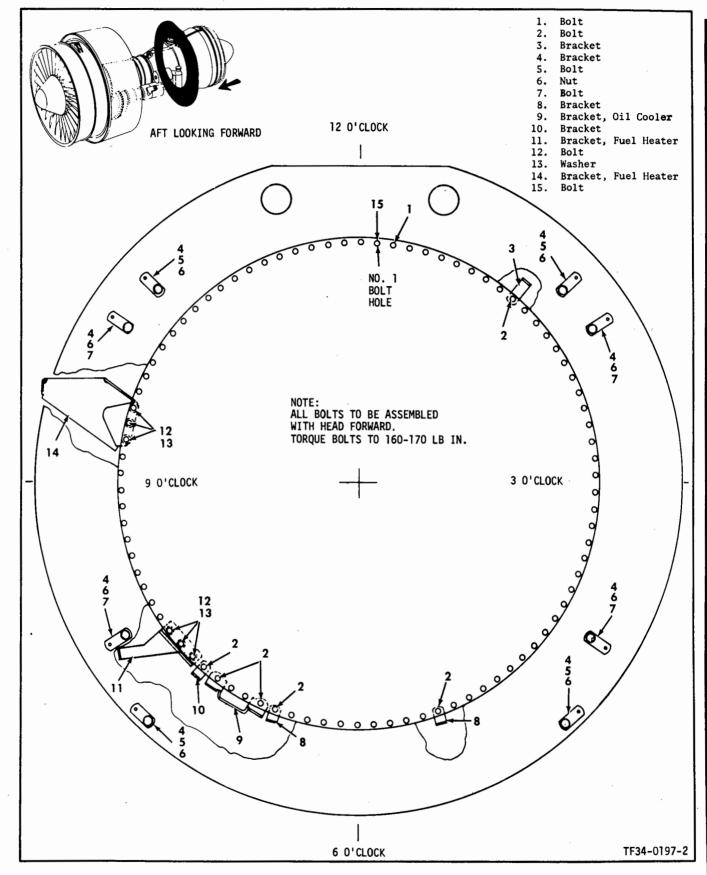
Bolting Diagram - High-Pressure Turbine Casing-to-Combustion Chamber
